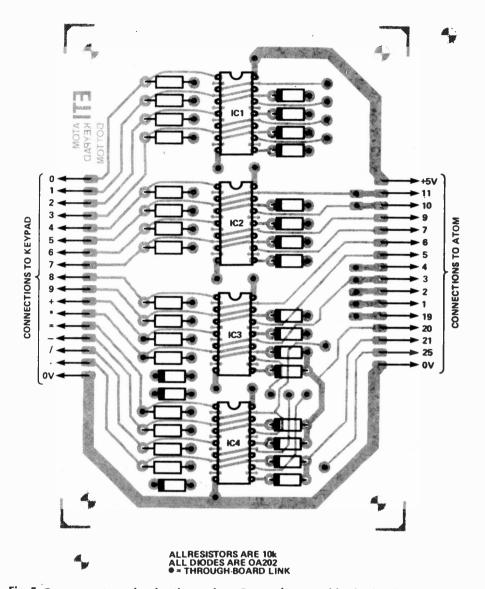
Component overlay for the project. Remember to solder both sides of the board at each point indicated by a dot.
